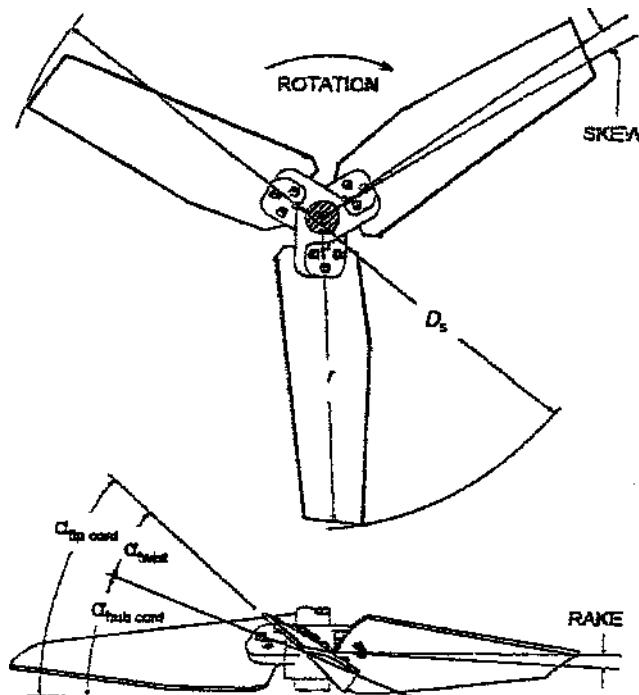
Drawing of typical lifter turbine. (By permission from Oldshue, J.Y., "Fluid Mixing Technology", *Chem. Eng.*, McGraw-Hill Publications Co., 1983 [14].)
